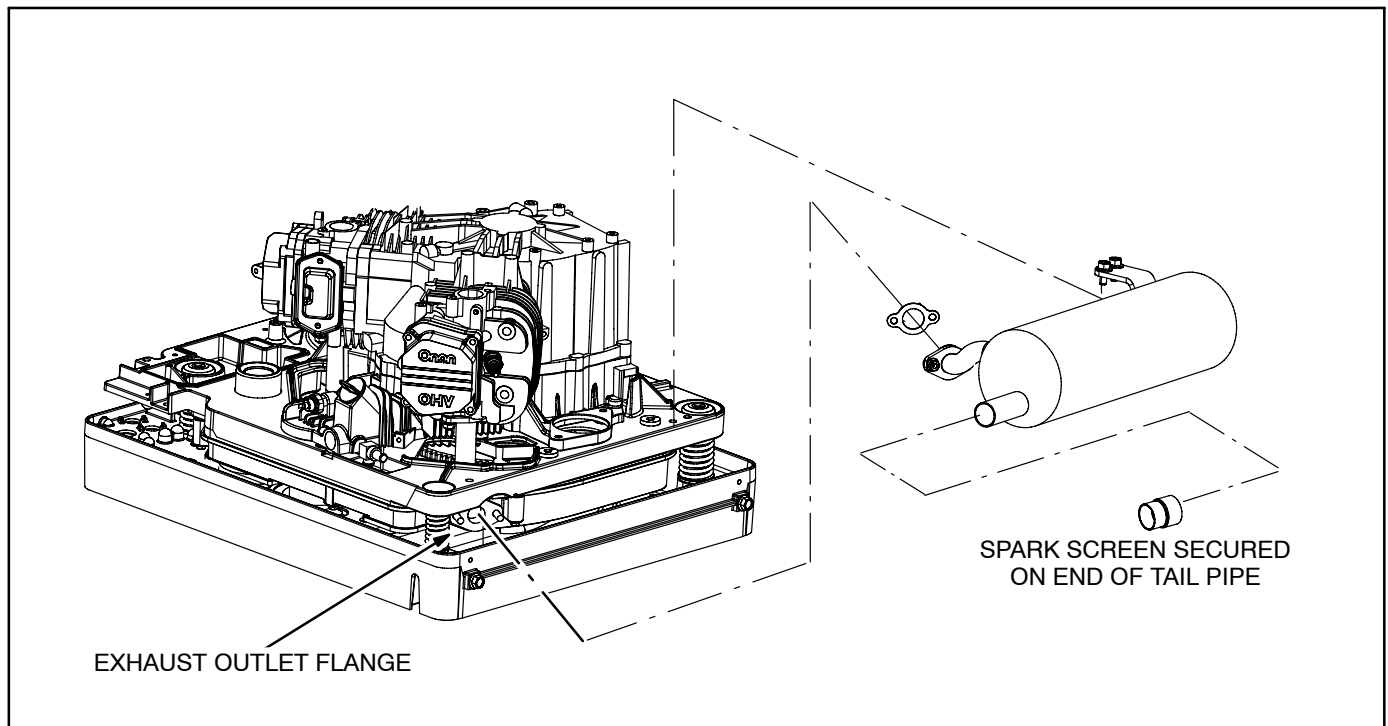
TYPICAL EXTERNAL MUFFLER KIT INSTALLATION
